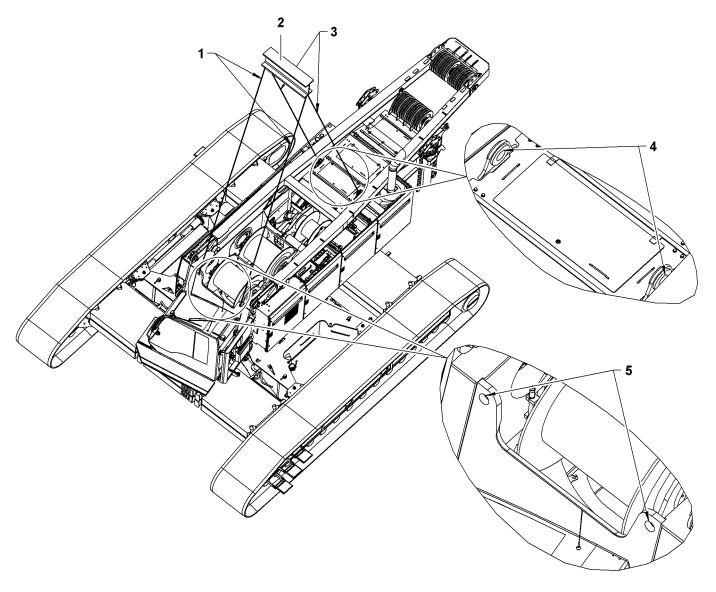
Loading the basic machine with crawler side frame and carbody counterweight - lifting points
